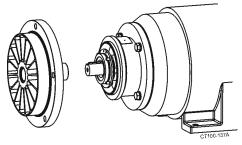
Remove Impeller, Backplate and Seal Assembly
